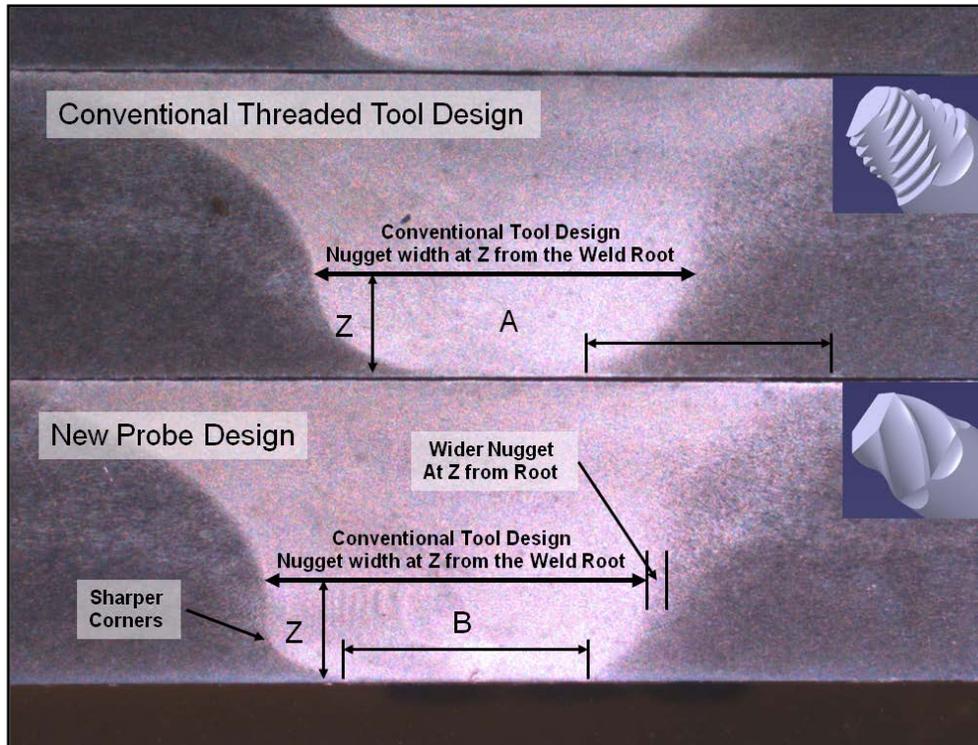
Cross sections of welds produced with a) a convention threaded tool (upper right) and b) the mandrel style FSW weld tool (patent pending) for scale; individual plates are 0.25-inch thick
